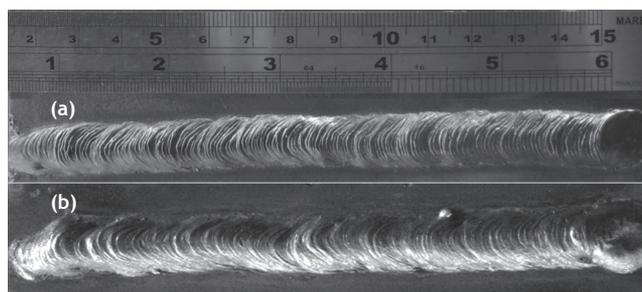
(a) Visual appearance of the bead on plate weld deposited with impermeable electrode; and (b) conventional E7018 electrode.
